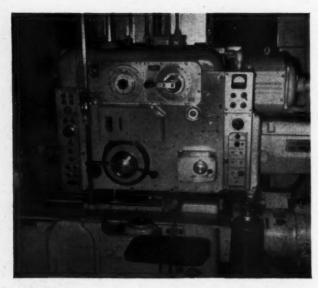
Close-up view of the spindle head on the Sverdlova machine in Fig. 1, showing the selector dials for spindle speeds and feed rates, and, at the lower right-hand side, one of the punched card control units for vertical movements of the head
